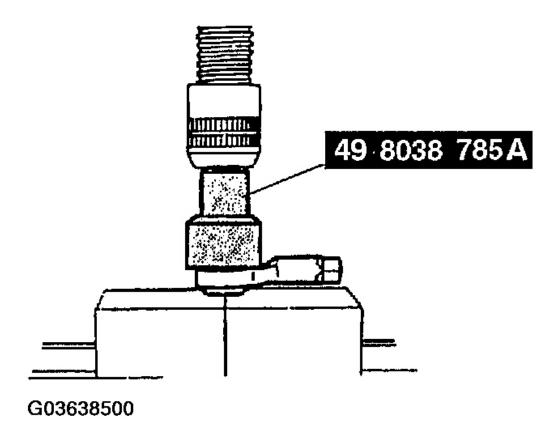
Installing Dust Boot Onto Tie-Rod End Courtesy of MAZDA MOTORS CORP.
